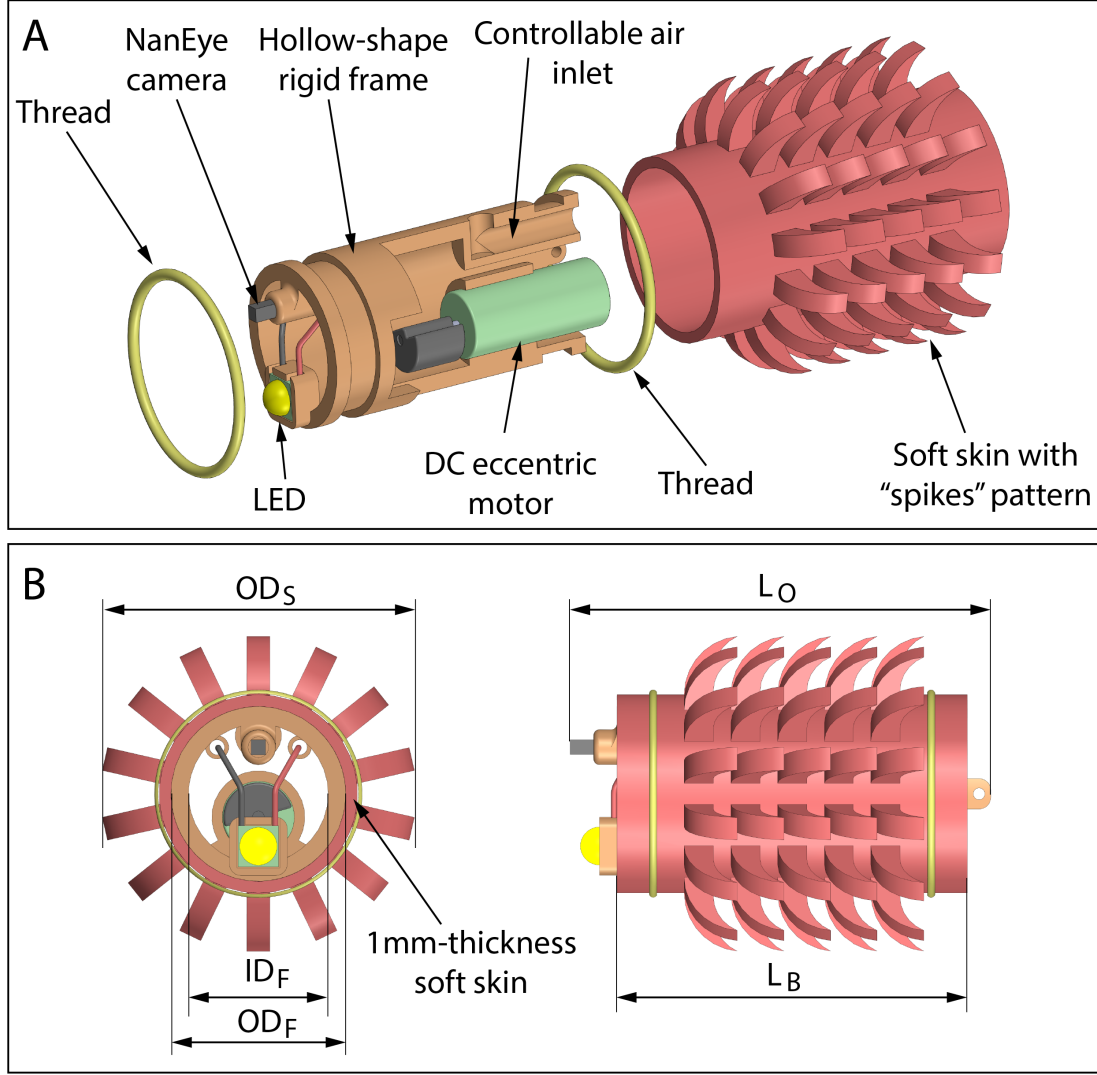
The 3D design model of PFR: (A) the component's view of PFR. (B) The front view and side view of PFR are shown with the dimensions, including the frame inner diameter  $ID_F = 12$  mm, the frame outer diameter  $OD_F = 15$  mm, the 1mm-thickness soft skin outer diameter  $OD_S = 27$  mm, the length of the PFR body  $L_B = 30$  mm, and the overall length of the PFR  $L_O = 33$  mm, when it is in the normal state.
